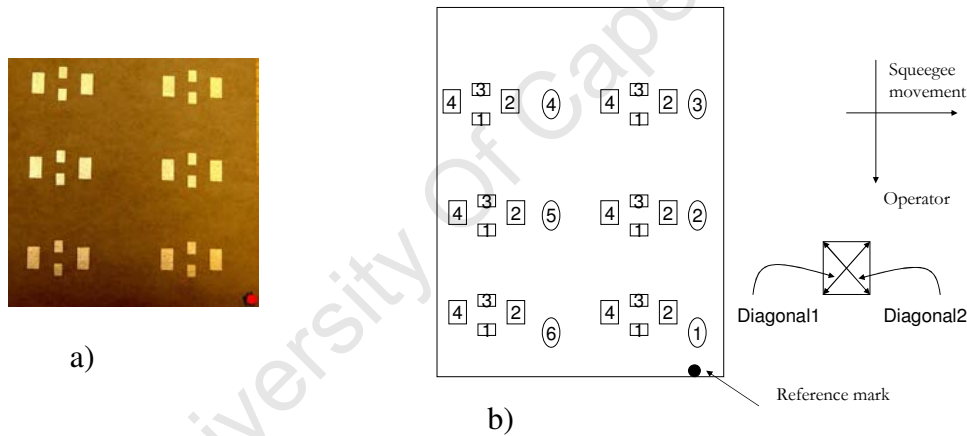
a) photograph of silver contacts printed on paper, b) code convention of contacts for Hall bar.
